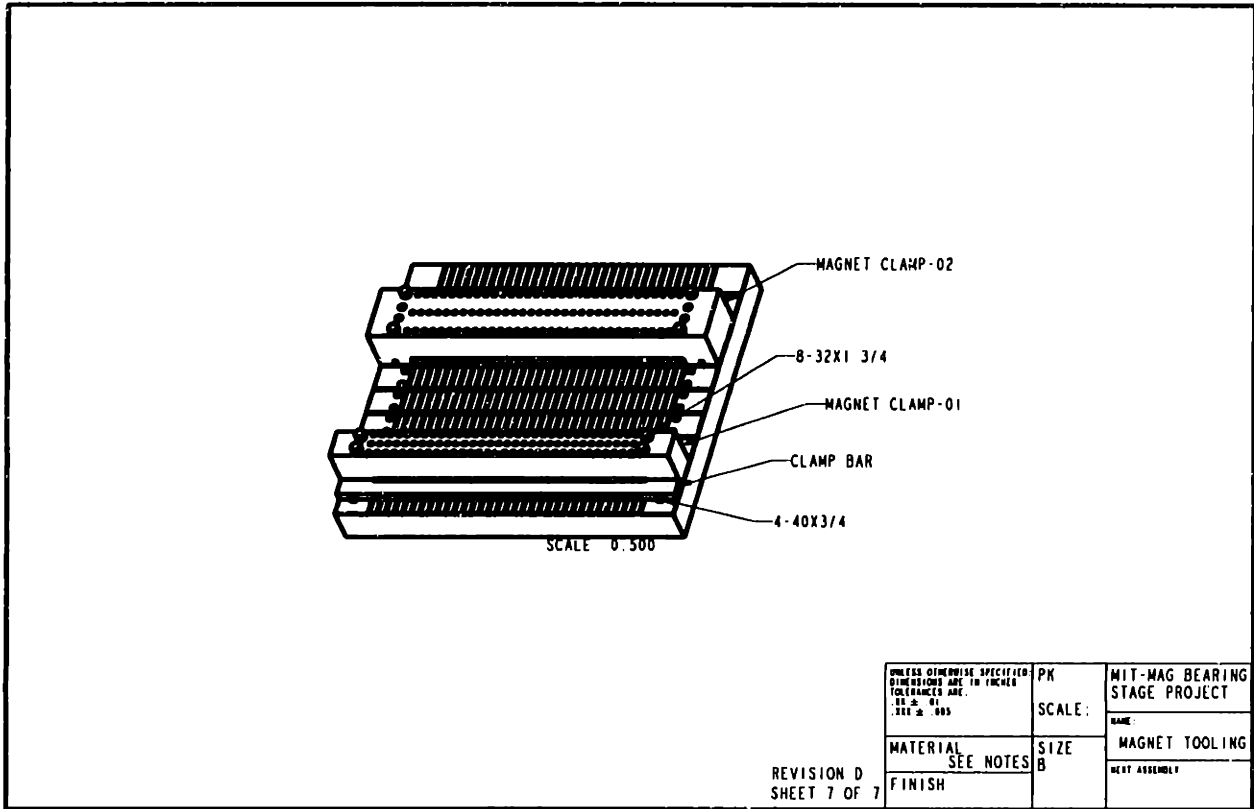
Tooling for assembling the prototype magnet array, continued III
